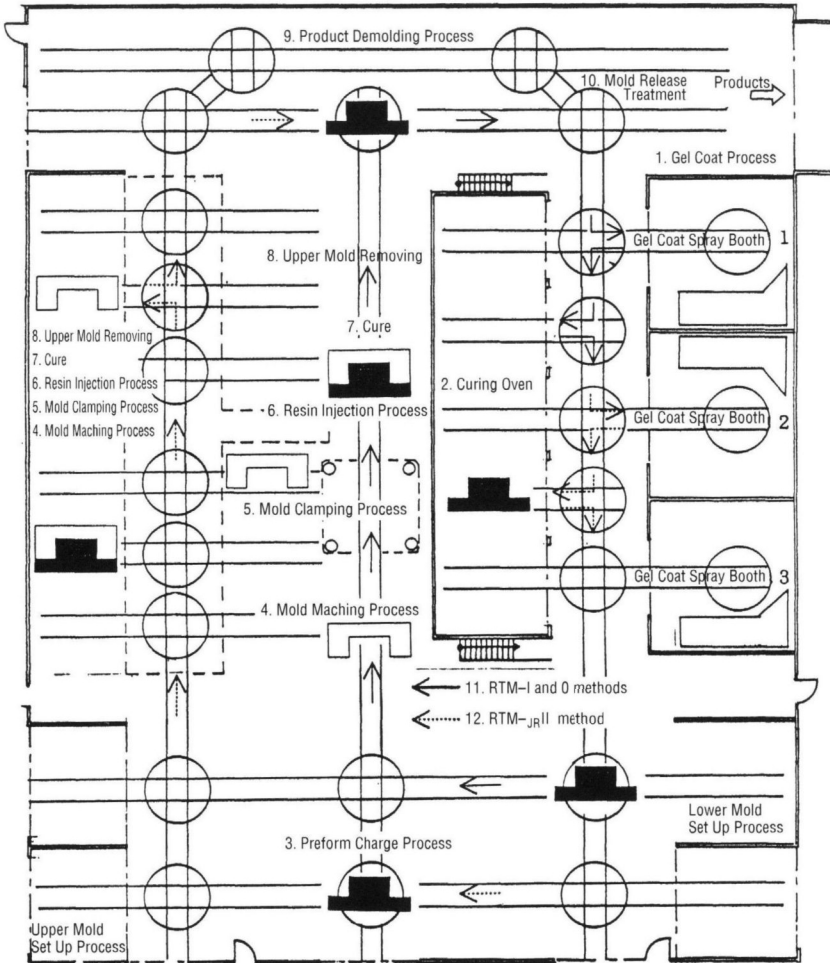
Molding line of RTM factory. 1. Gel Coat Process; 2. Curing Oven; 3. Preform Charge Process; 4. Mold Maching Process; 5. Mold Clamping Process; 6. Resin Injection Process; 7. Cure; 8. Upper Mold Removing; 9. Product Demolding Process; 10. Mold Release Treatment; 11. RTM-I and 0 methods; 12. RTM-JR II method.
